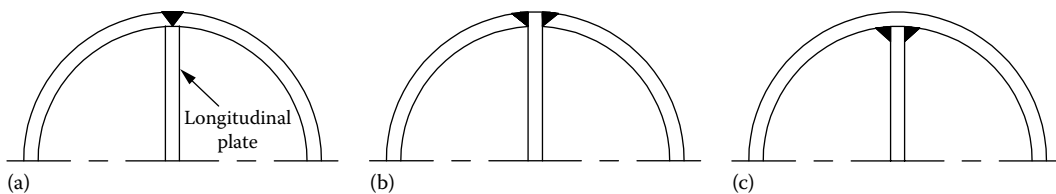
Longitudinal baffle weld joint with shell. (a) Shell gouged and welded, (b) baffle passes through shell and welded, and (c) baffle welded to inside of the shell.
